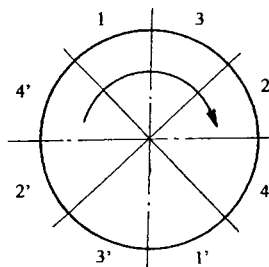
Process of thermal spraying welding in upper and lower labyrinth
